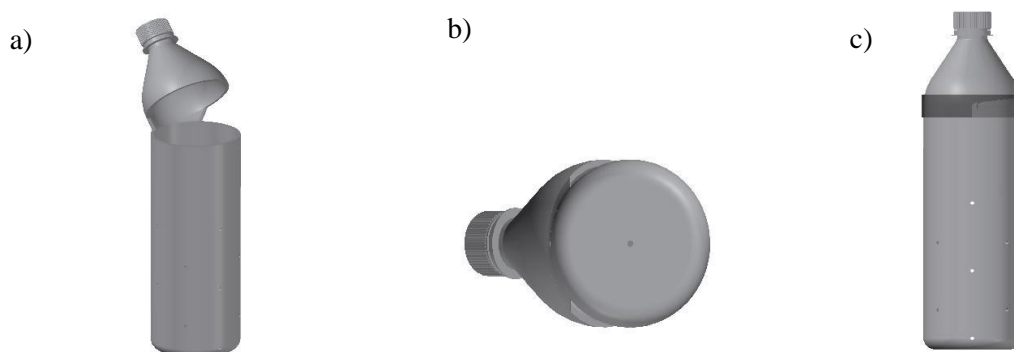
The a) front, b) bottom view of opened compost bottle and, c) front view of closed compost bottle using adhesive tape
